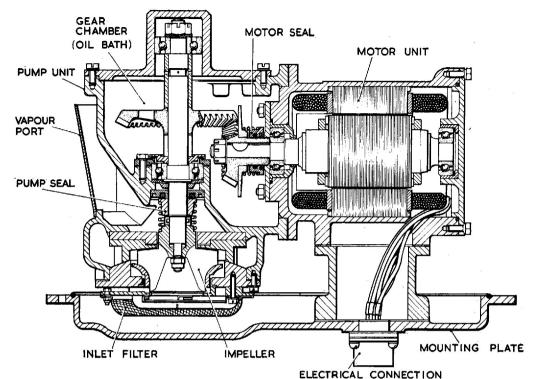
Sectional view of Type PAC. 1200 fuel pump
